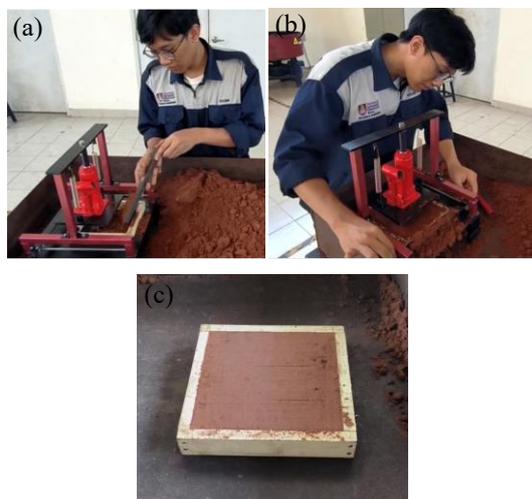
Casting process of sand (a) pour sand into the mold, (b) flatten the sand using strike bar and (c) sand after casting.
